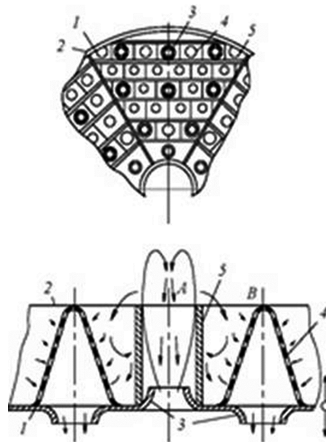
Vibrotransporting plate: 1 - disk with jets; 2 - flange; 3 - jet; 4 - filtering element; 5 - branch pipe.
